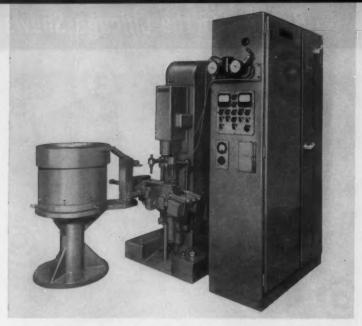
Model 111 honing machine equipped with air-electric hone expansion, Plugmatic sizing, automatic loading, and precision gaging equipment
